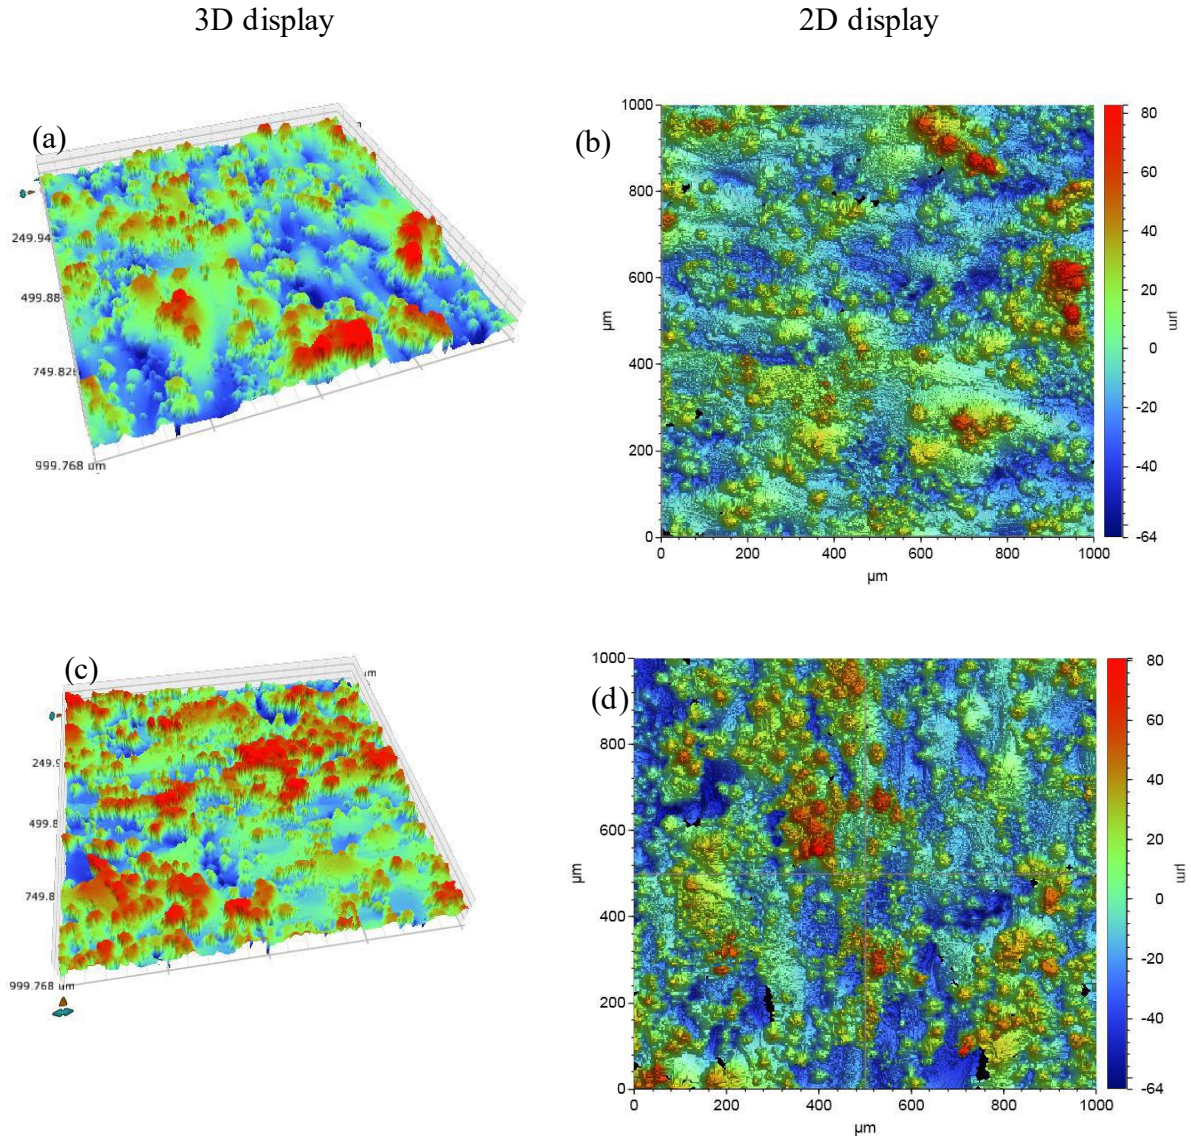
Surface finishes of (a,b) horizontally built SLM Ti6Al4V, and (c,d) vertically built specimens
